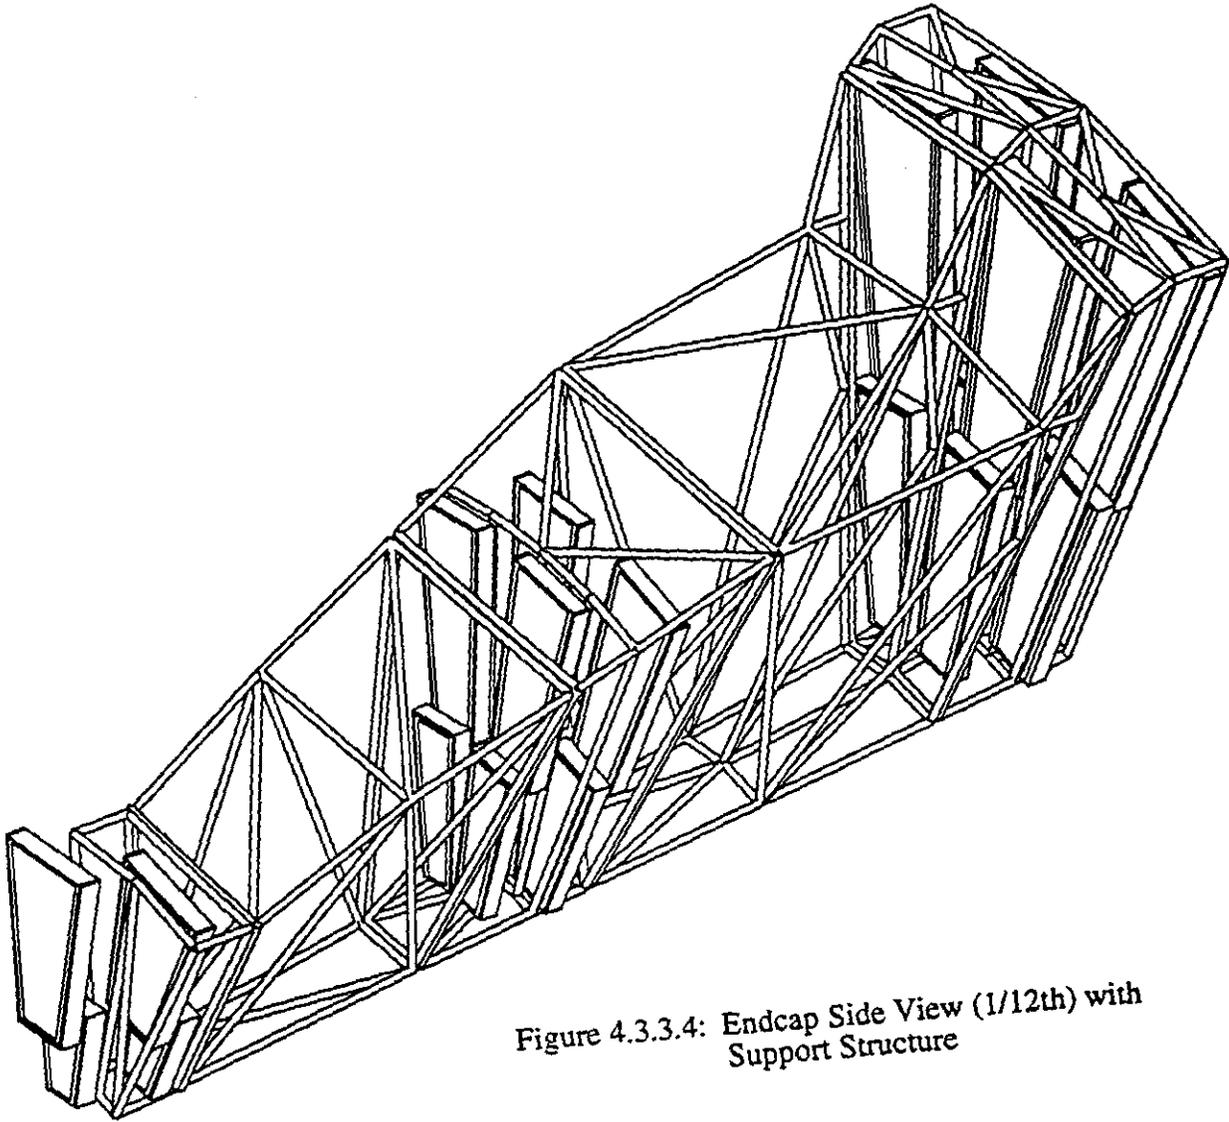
Endcap Side View (1/12th) with Support Structure
